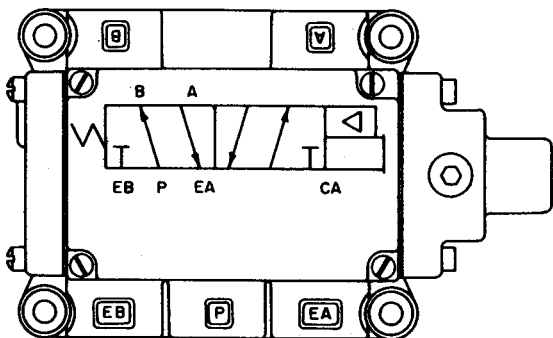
TURN VALVE ACTUATOR CONTROL VALVE
